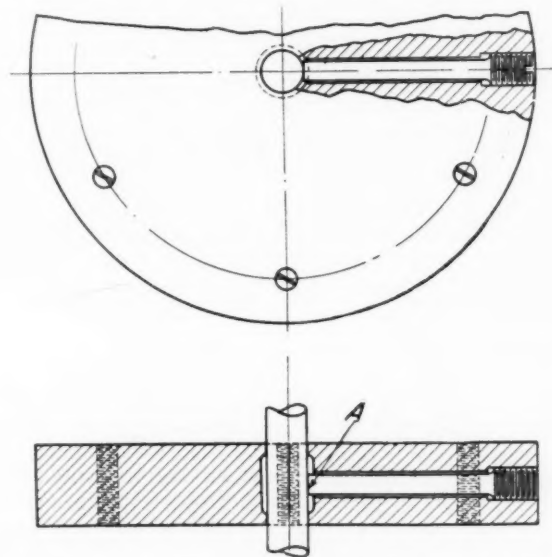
METHOD OF MOUNTING DISK TO PRODUCE UNBALANCE BY BOWING SHAFT
